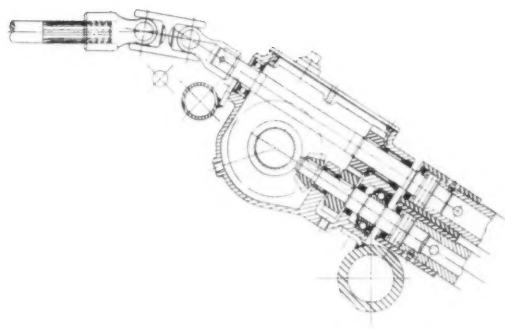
Cross section of snapping roll couplings, gear box and universal joint drive
